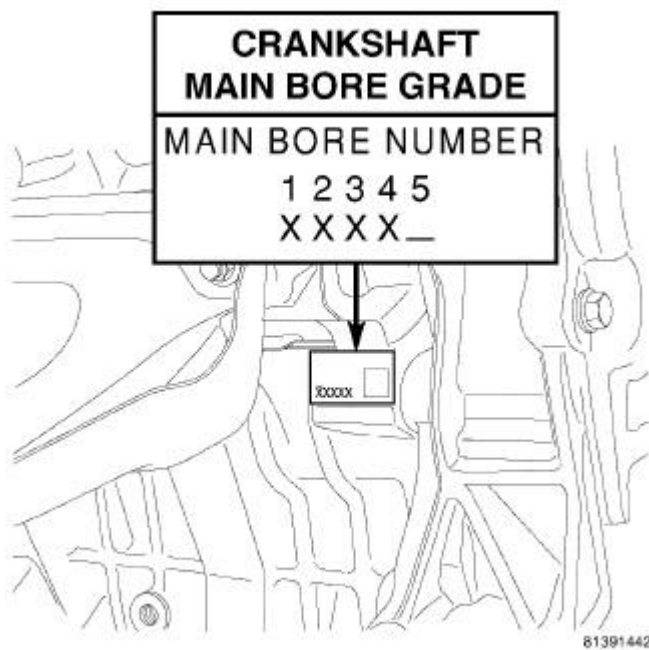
ENGINE BLOCK MAIN BORE GRADE
